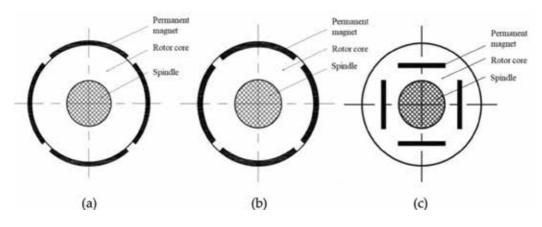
PMSM motor rotor structure. (a) Surface-mounted; (b) Plug-in; and (c) Interior-mounted.
